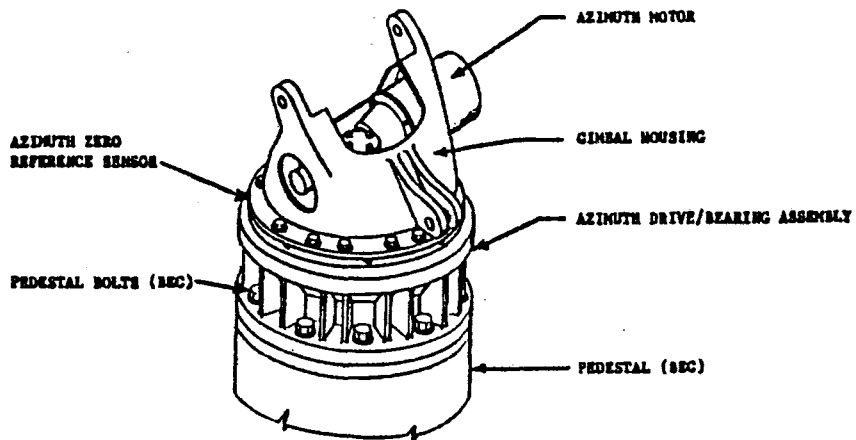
Gimbal Housing and Azimuth Drive/Bearing Assembly
